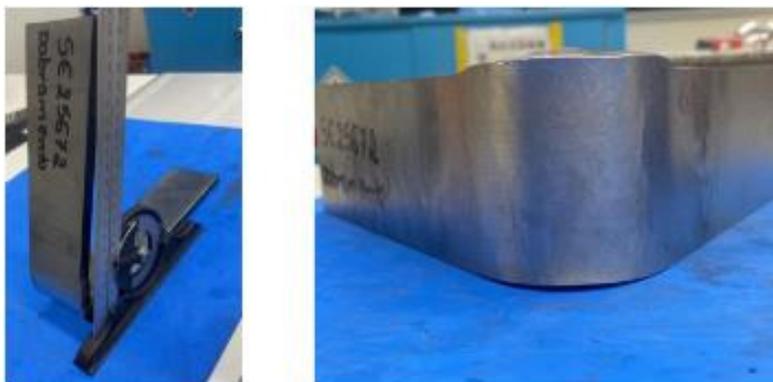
Test piece showing 120° bending angle and absence of cracks.
